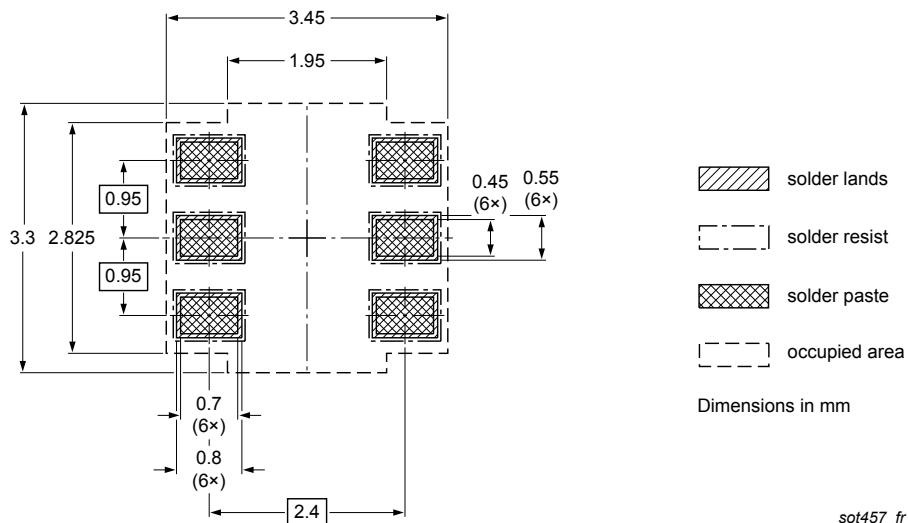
Reflow soldering footprint for TSOP6 (SOT457)
